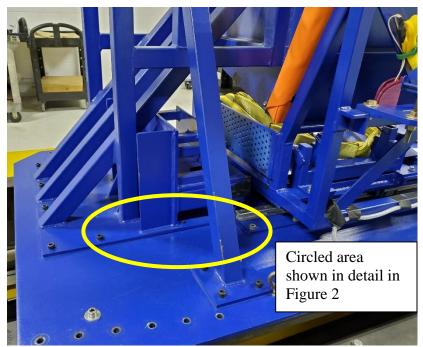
Graco Impactor Frame Assembly and Base Plate.
